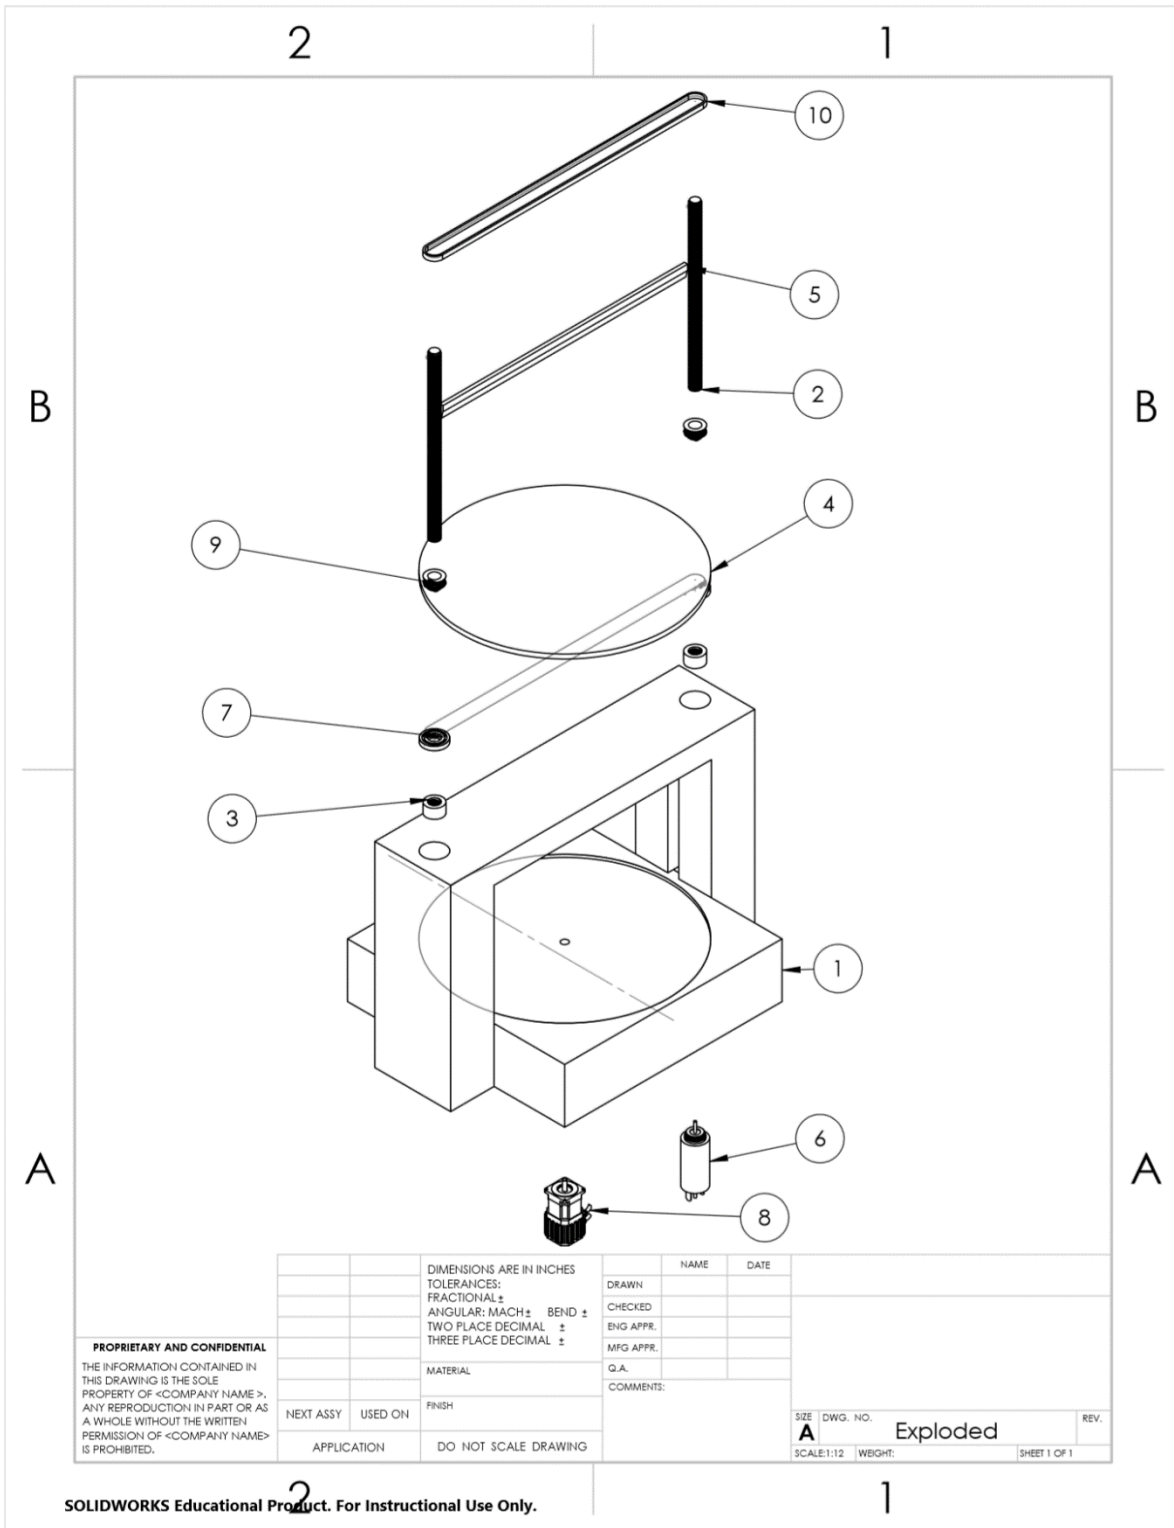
Exploded view of CAD embodiment of Automatic Pizza Cutter with balloon callout
